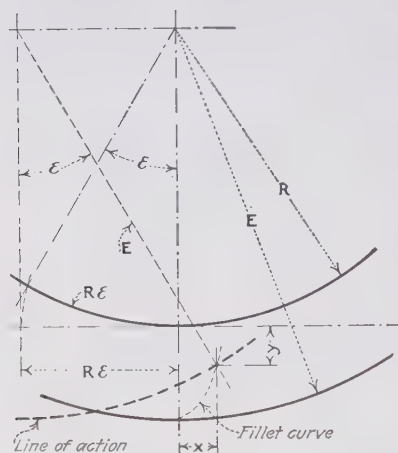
Development of a rack formed by a pinion-shaped cutter.
